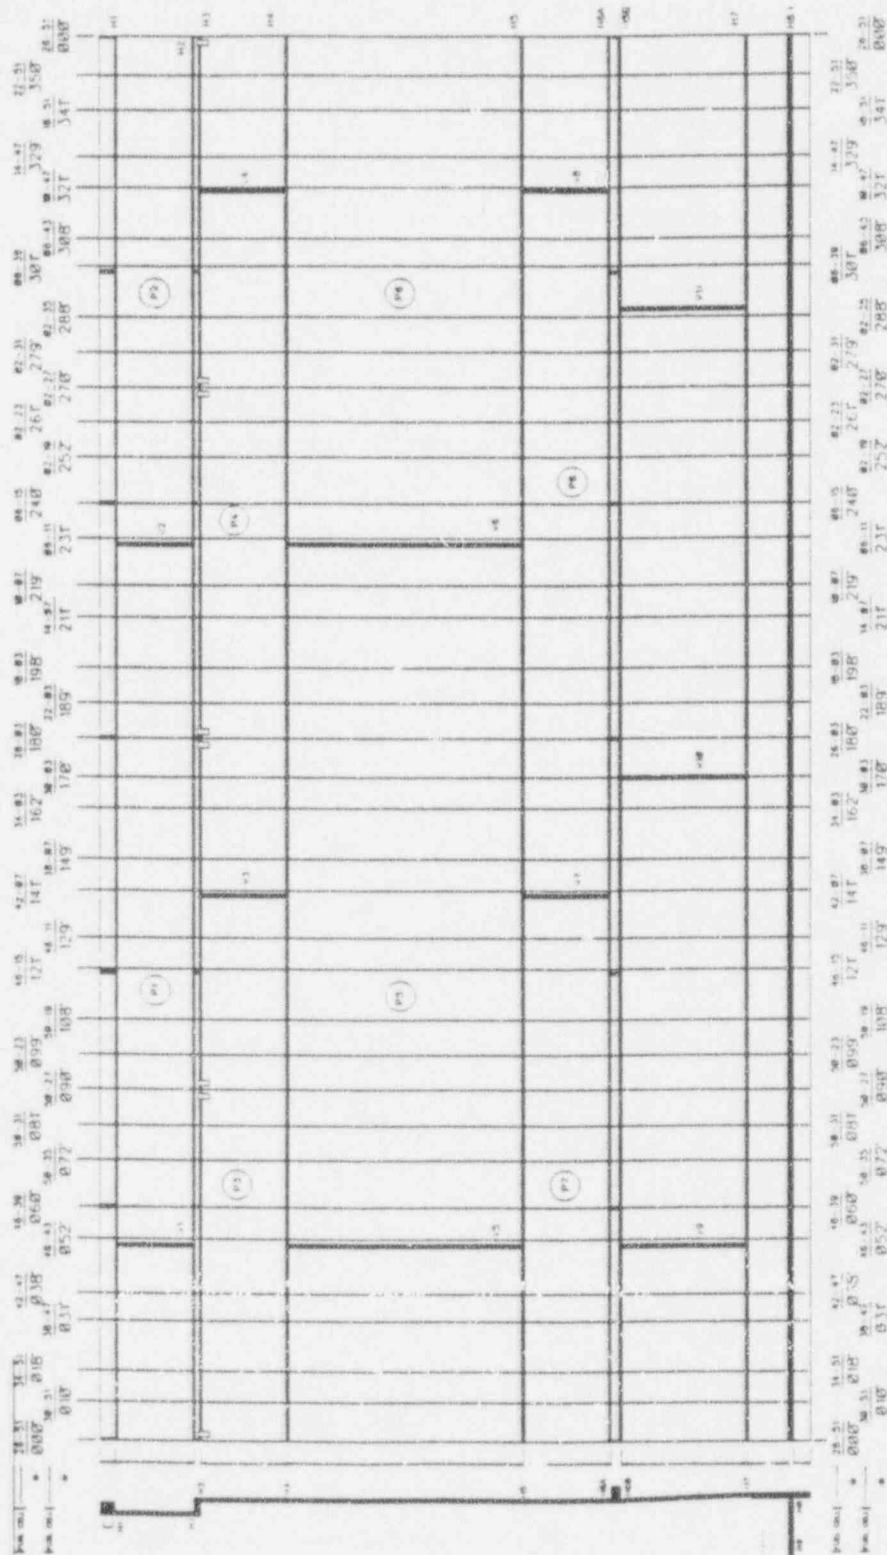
Roll-Out View of Inside Shroud Surface
